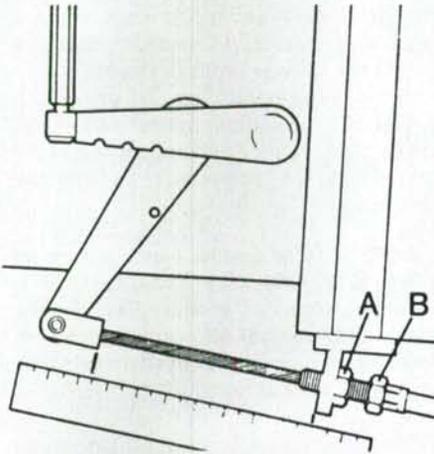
Adjust pto clutch by turning cable adjuster (B) until cross-shaft lever free movement is 3-5 mm ( $\frac{1}{8}$ - $\frac{1}{4}$  inch).
